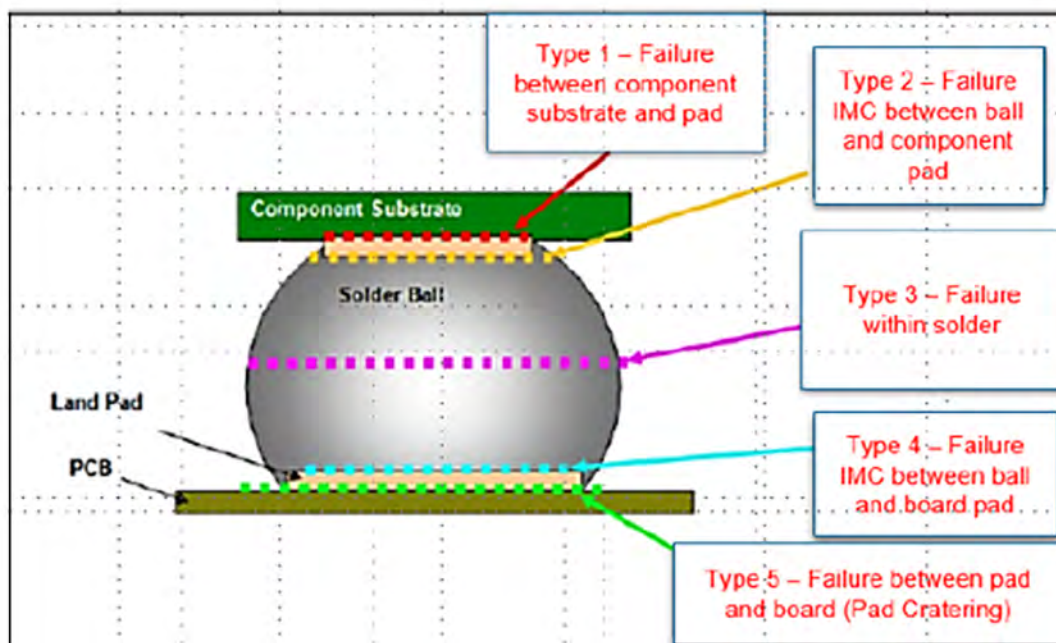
Failure mode descriptions. A Type 5 failure mode is between the board land pad and the board while a Type 4 failure is in the IMC on the board side.
